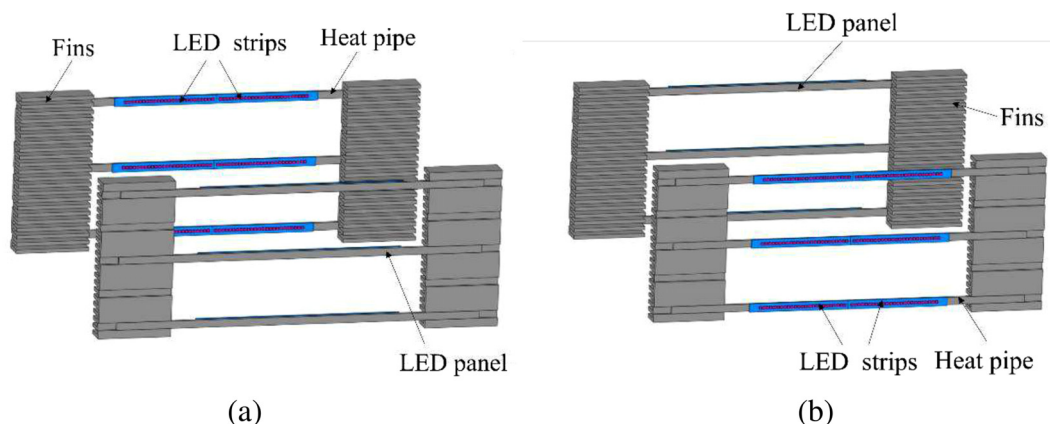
Fins of the heat sink located (a) in front and (b) at back of LED strips.
